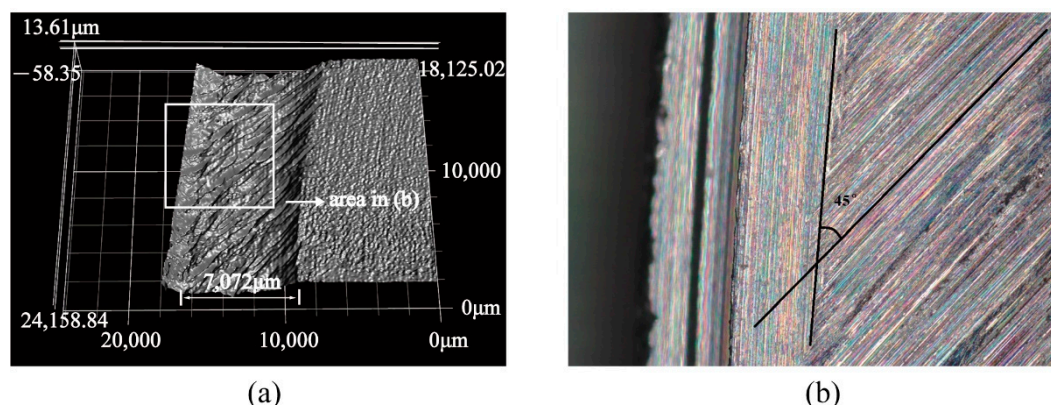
(a) Three-dimensional profile of grinding marks on the rail sample surface, (b) the angle between the grinding marks and the grinding direction.
